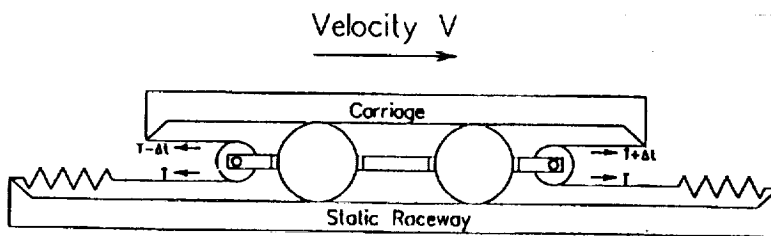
THE LINEAR ROLLER-BEARING GUIDED SLIDE
